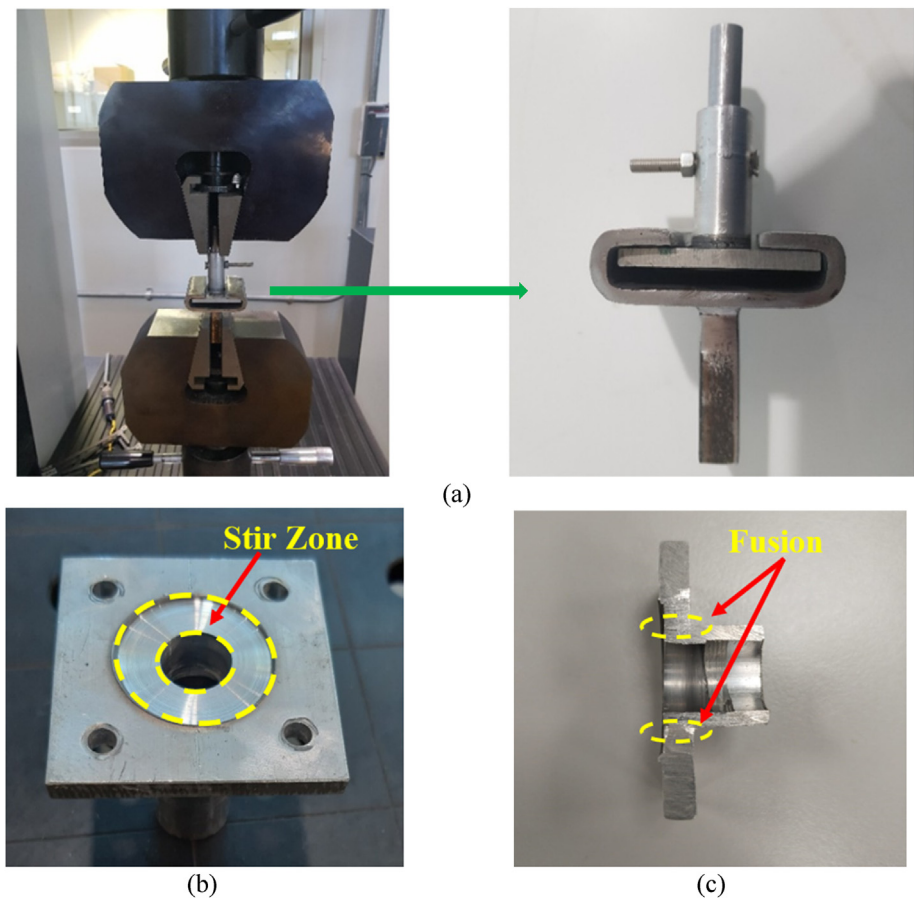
(a) Developed fixture for performing tube pull-out test, zones at TTSJ (b) stir zone, and (c) fusion zone.
